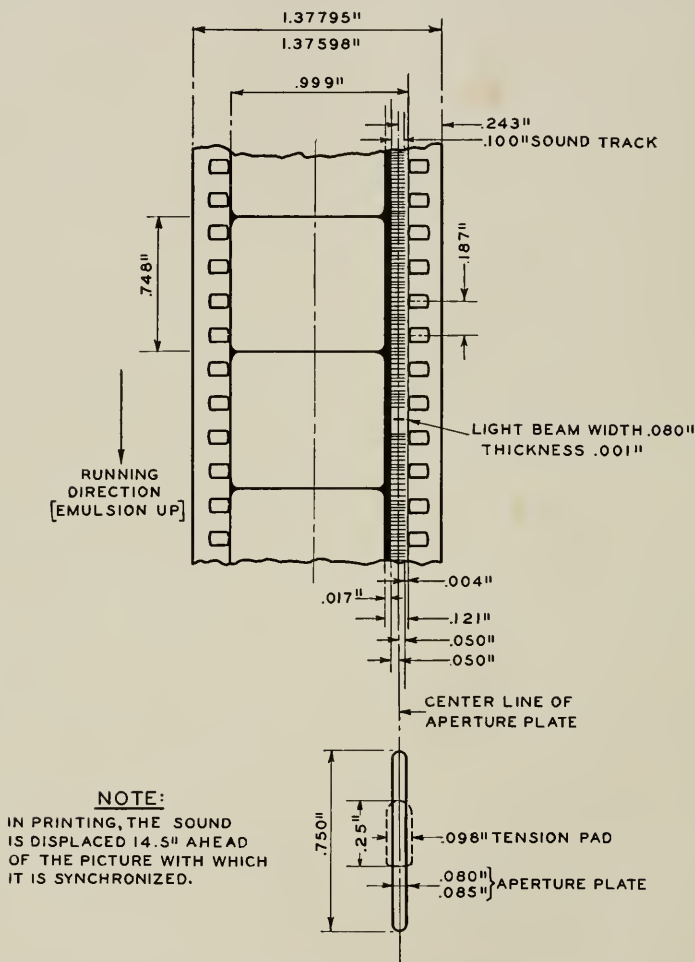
Picture and sound track dimensions of synchronized sound film for standard 35 mm. positive stock.
